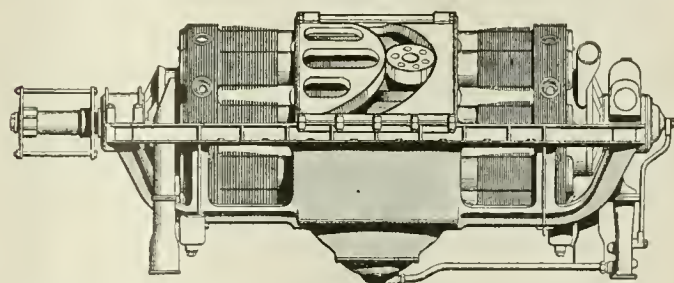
GENERAL VIEW OF ENGINE, WITH TOP HALF OF COVER REMOVED, SHOWING ONE OF THE ROLLERS WHICH TRAVEL IN THE STATIONARY CAM PATH
